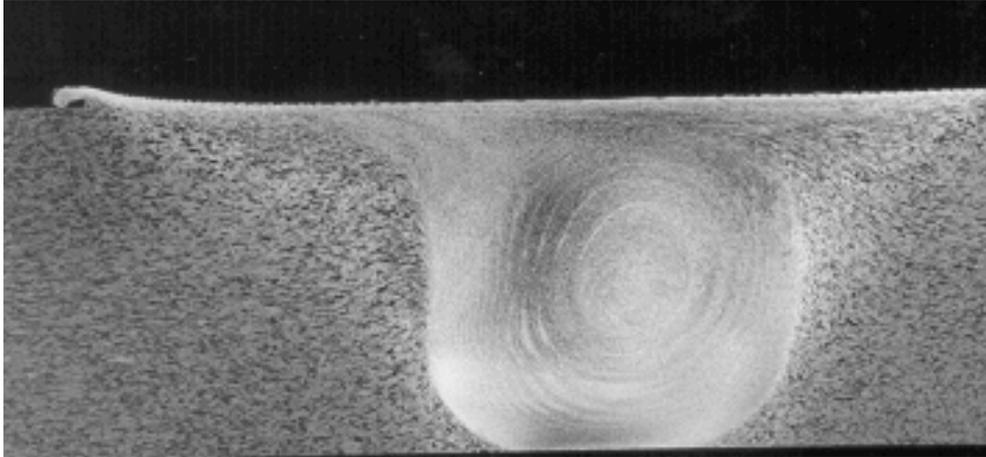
Typical cross section of FSW weld nugget cross section²²
